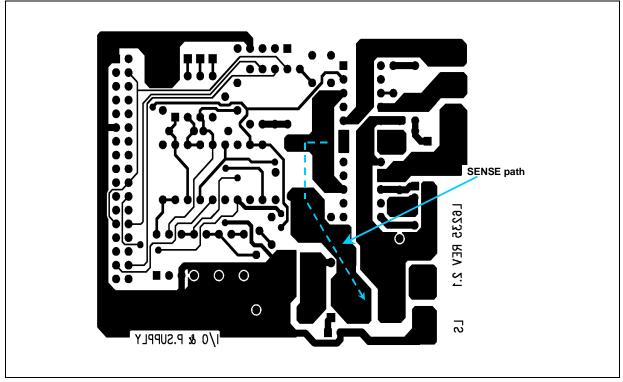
L6235 Evaluation Board Bottom Layer Layout.
